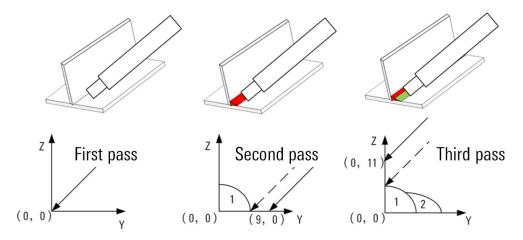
Diagram of two-layer three-pass welding
